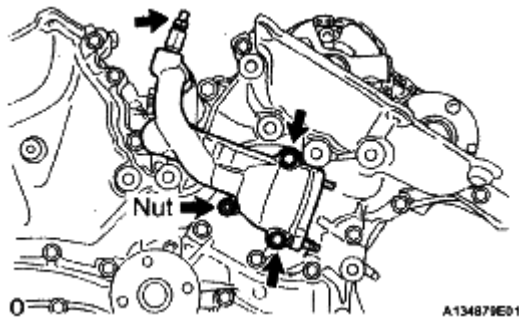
Identifying Water Inlet Housing Bolts & Nut
